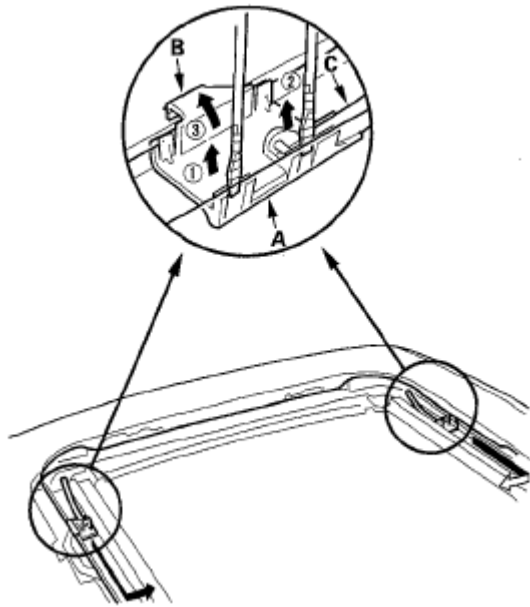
Identifying Deflector Bases, Hooks And Springs
